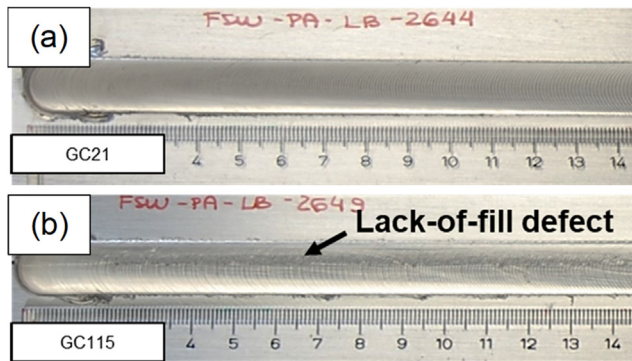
Photographs of the welds produced with a real gap width of (a) 0.21 mm and (b) 1.15 mm.
